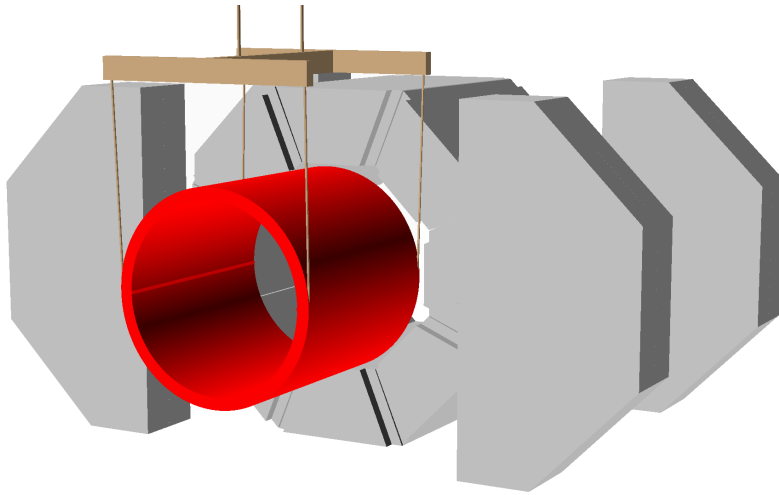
(Var-2) The magnet is lowered by a crane and held in the position to make it coaxial with RS.
